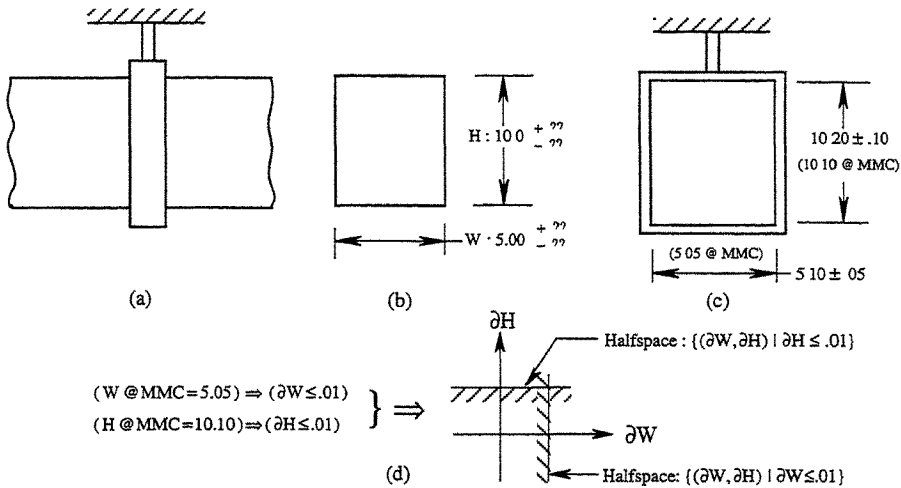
Tolerancing for assembly using MMC criteria.
